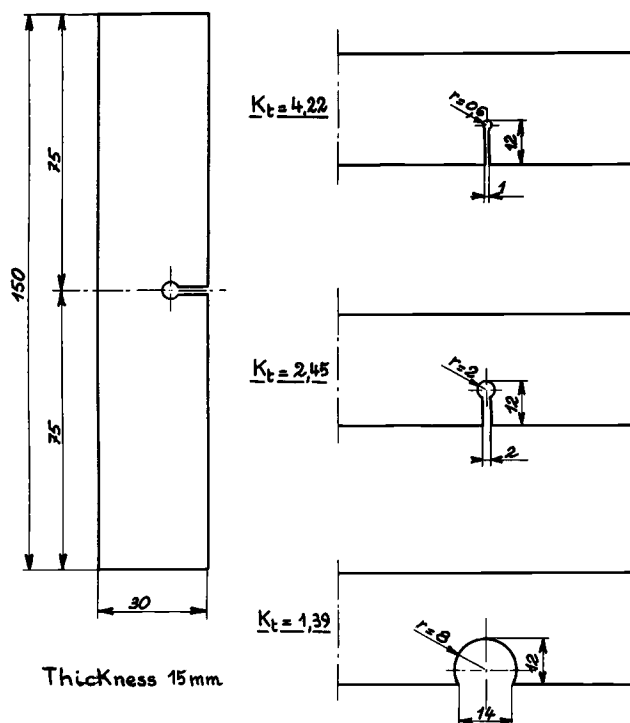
Notched specimens for fatigue crack initiation tests.
